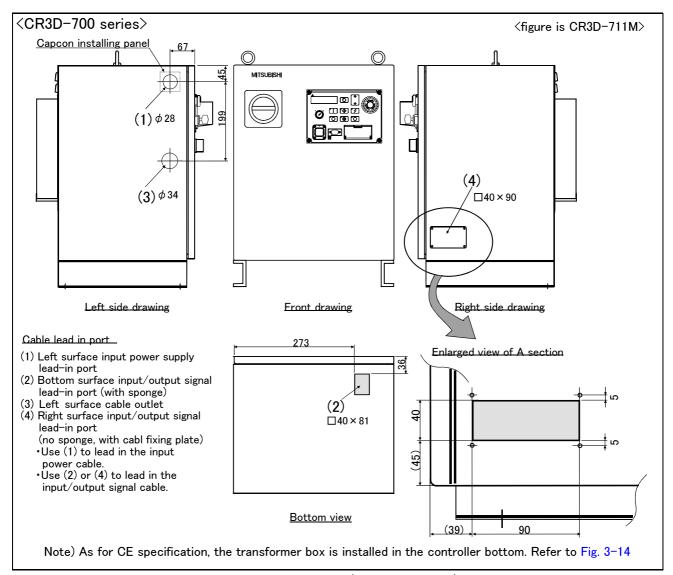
Cable lead-in and dimension of the controller (CR3D-700 Series)
